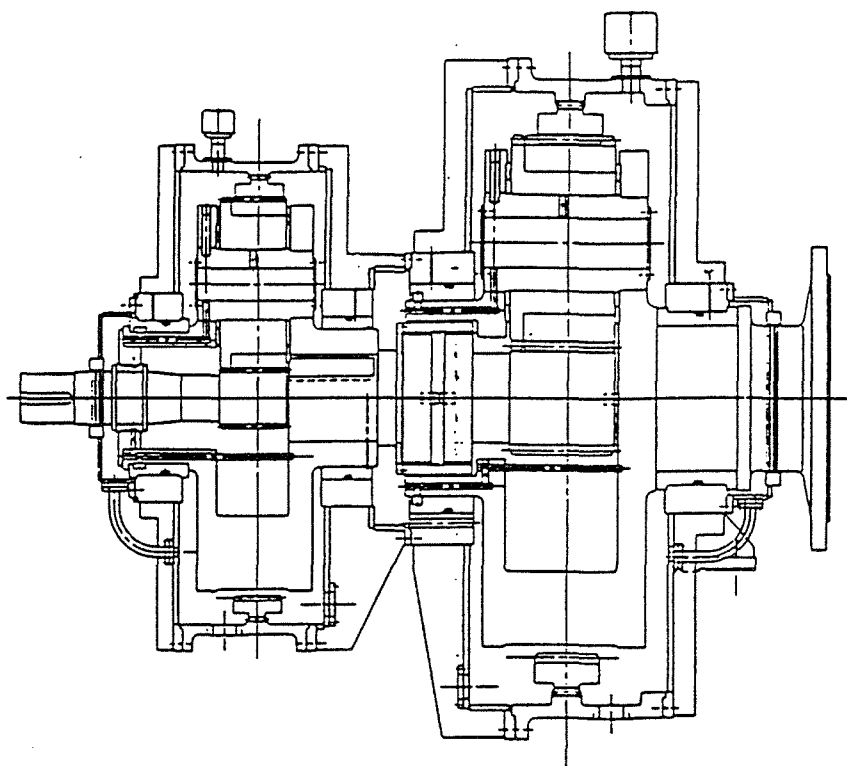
Center drive type for ball mill (Planetary reduction gear)
